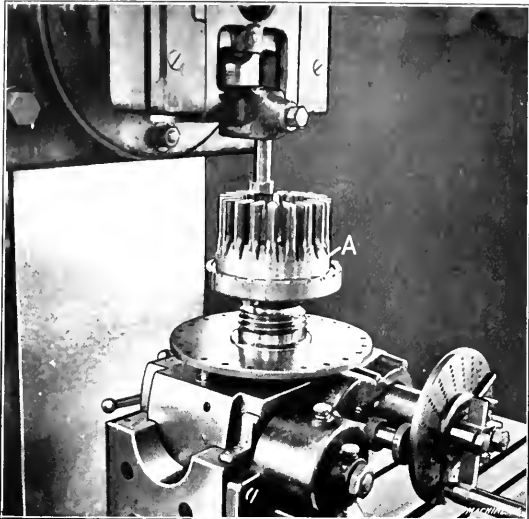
Final Shaping Operation on the Inner Ends of the Punch Prongs, using a Slotting Attachment and a Dividing Head on the Milling Machine
